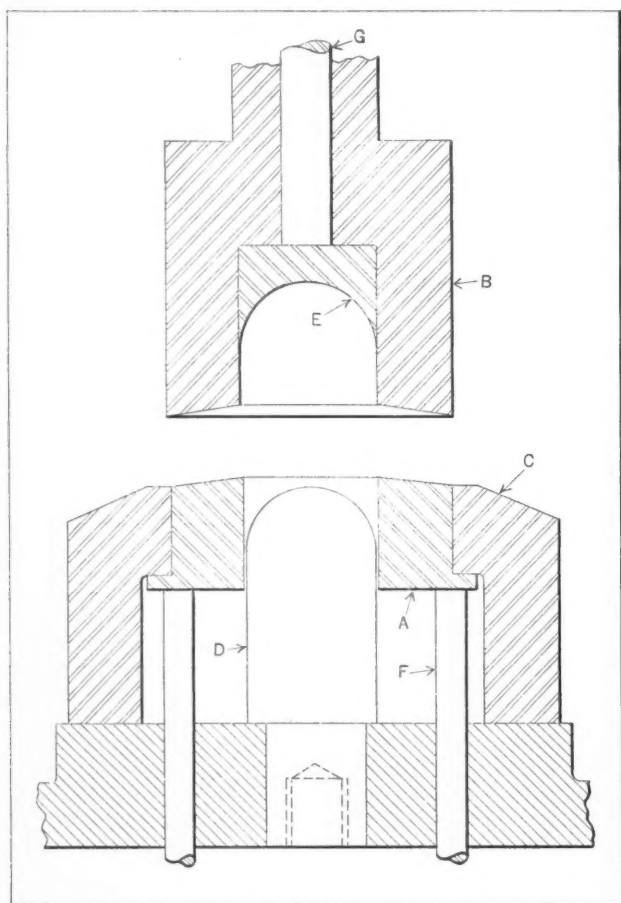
Die that Draws Blank to Shape Shown at A, Fig. 1
